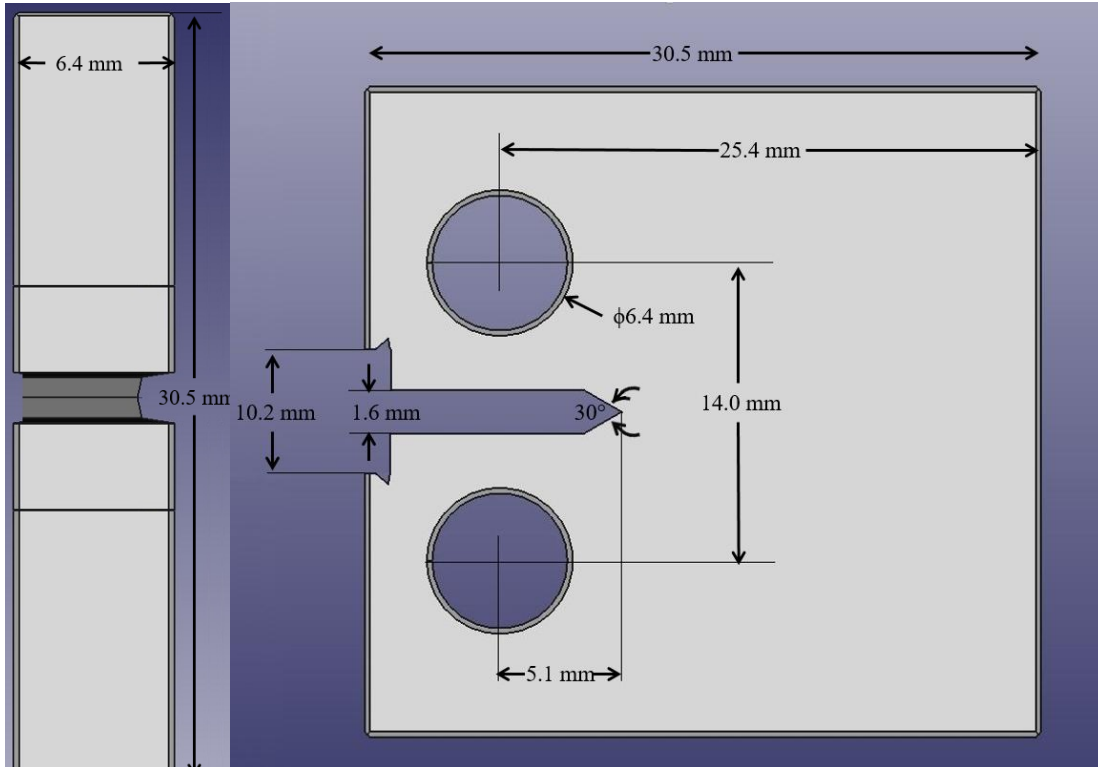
ASTM E647-15 Annex A1 and ASTM E399-20 Annex A4 compliant CAD drawing [31, 33]
